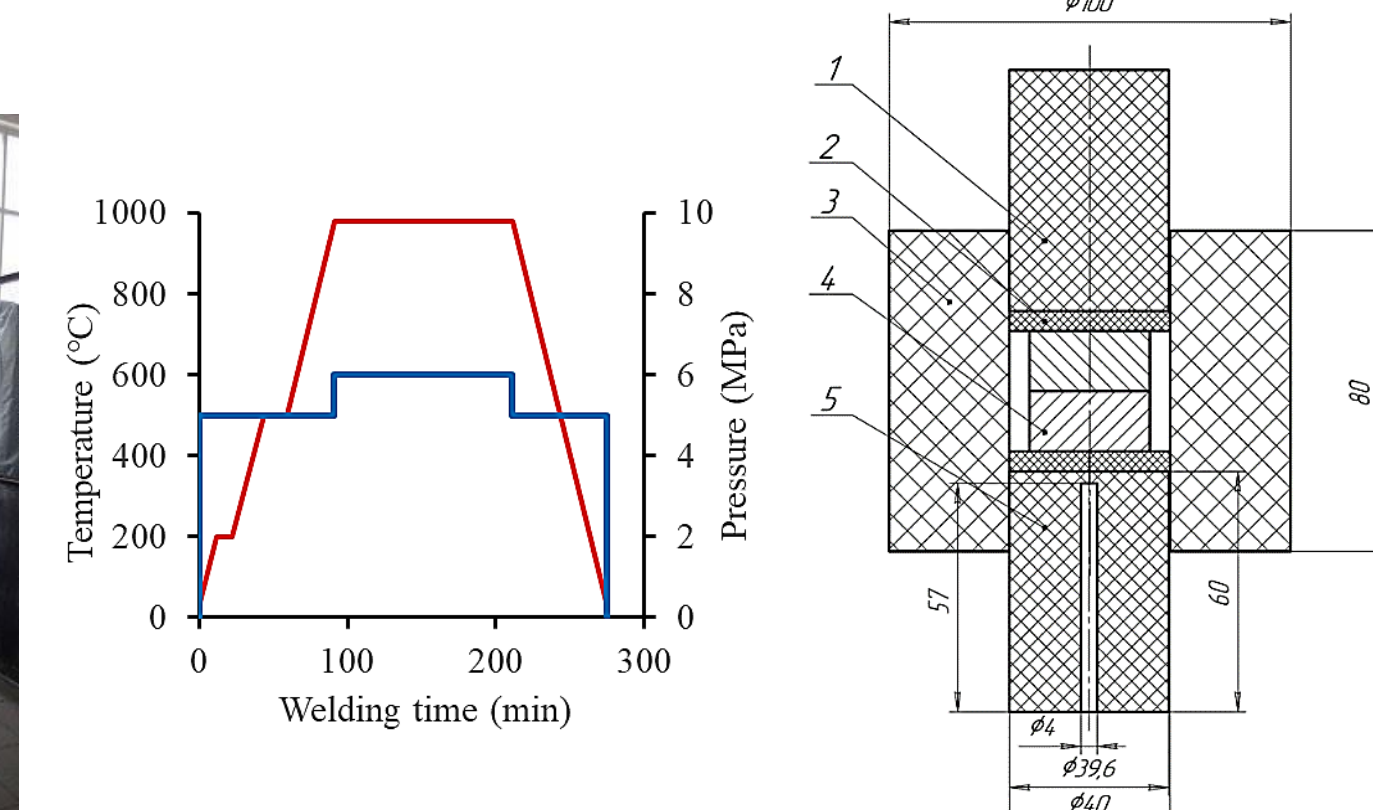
Welding cyclogram and image of the placement of samples inside the matrix with punches: 1 - upper punch; 2 - corundum electrically insulating plate; 3 - matrix; 4 - welded samples; 5 lower punch with a technological hole for a thermocouple
